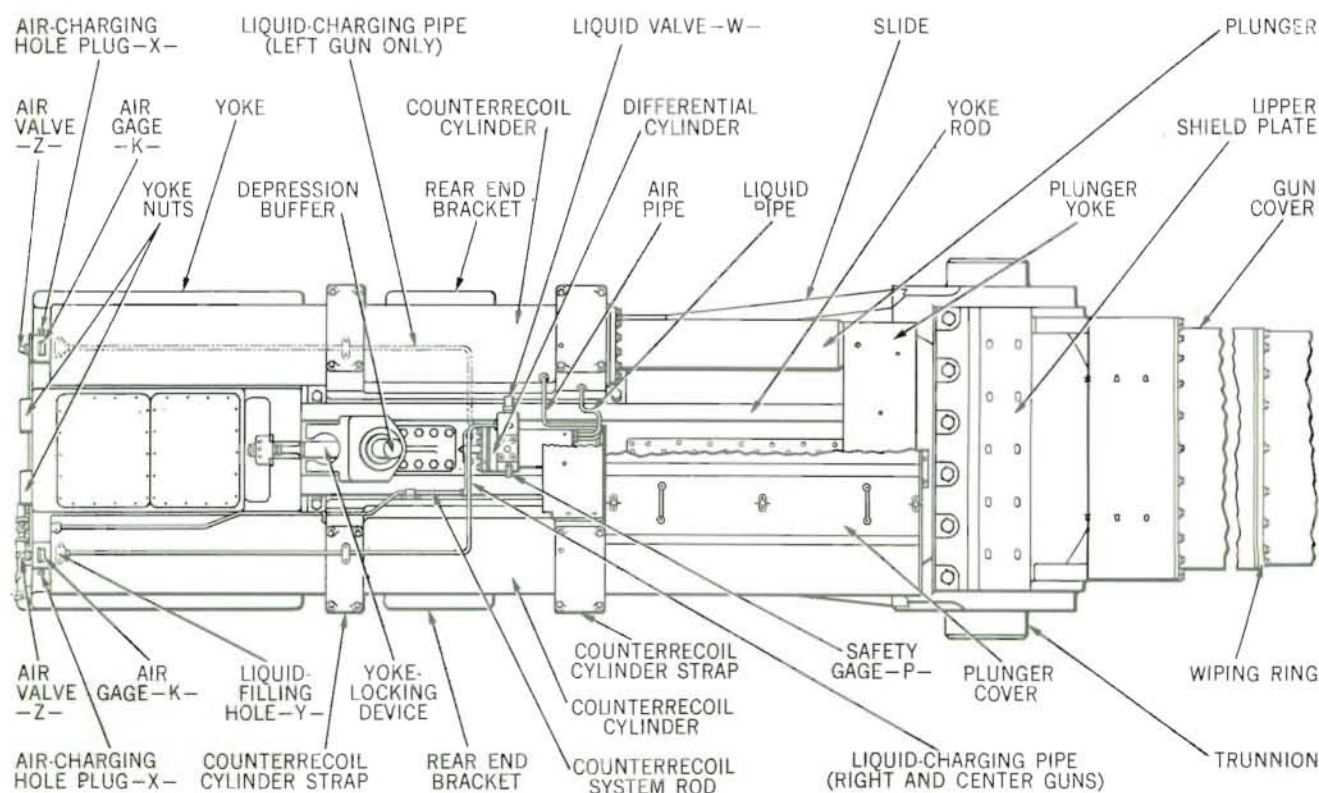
16-inch Slide Mk 6 Mod 0, General Arrangement, Plan View
